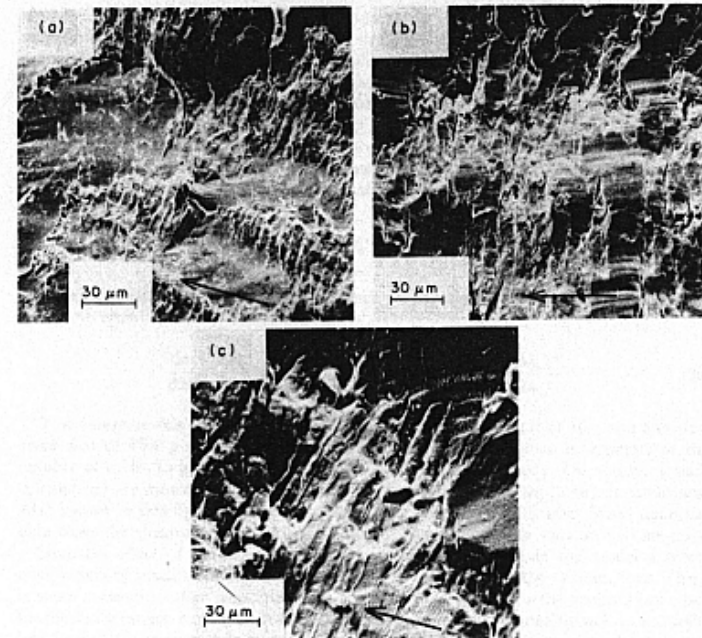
Striations observed on HTLCF fracture surfaces at a crack length of (a) 1.6 mm (hot rolled material tested in vacuum), (b) 1.2 mm (hot rolled material tested in air) and (c) 1.4 mm (hot forged material tested in air).
